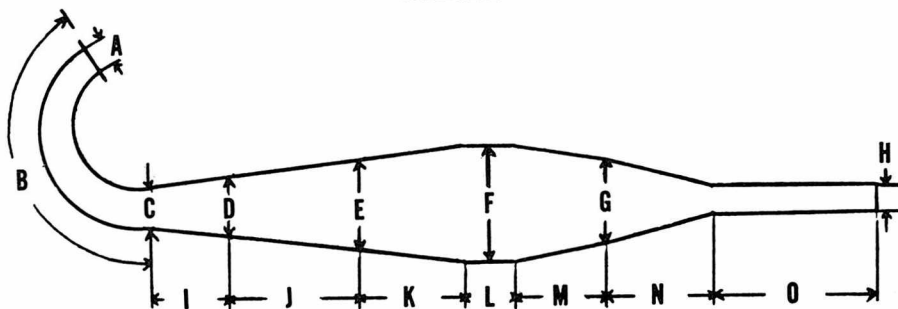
An expansion chamber constructed to this set of specifications will produce a high RPM (peaky) performing engine.
